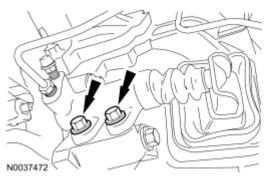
Locating Clutch Slave Cylinder Bolts Courtesy of FORD MOTOR CO.
